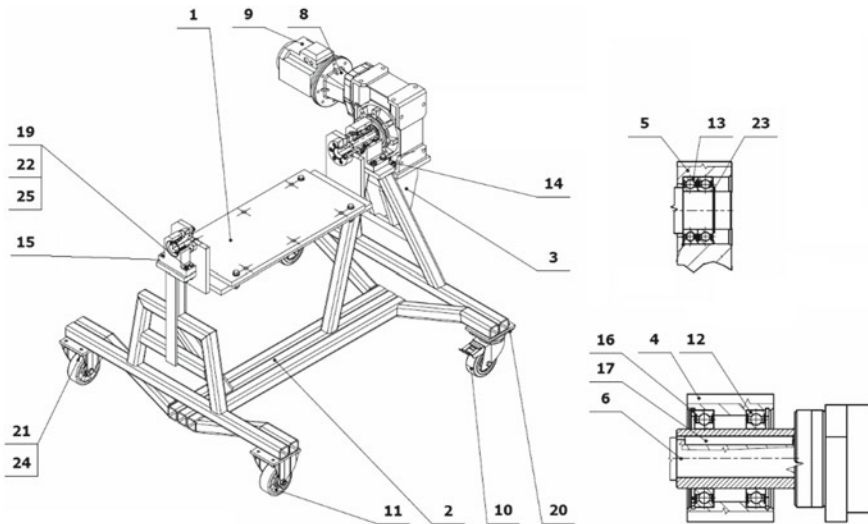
Complete design of device (Legend: 1—Working table, 2—Frame, 3—Motor support, 4—Driven pivot support, 5—Pivot support, 6—Support pivot, 8—Worm gearbox, 9—Electric motor, 10—Moveable wheel, 11—Fixed wheel, 12—Ball bearing, 13—Ball bearing, 14—assembly of housing A, 15—assembly of housing B)
